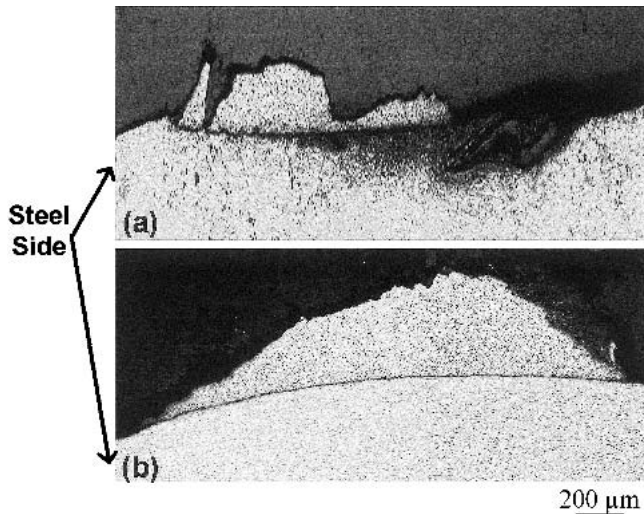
Cross sections of fracture surfaces of the steel side for the specimens showing high fracture loads. (a) Weld No. 12. (b) Weld No. 6
